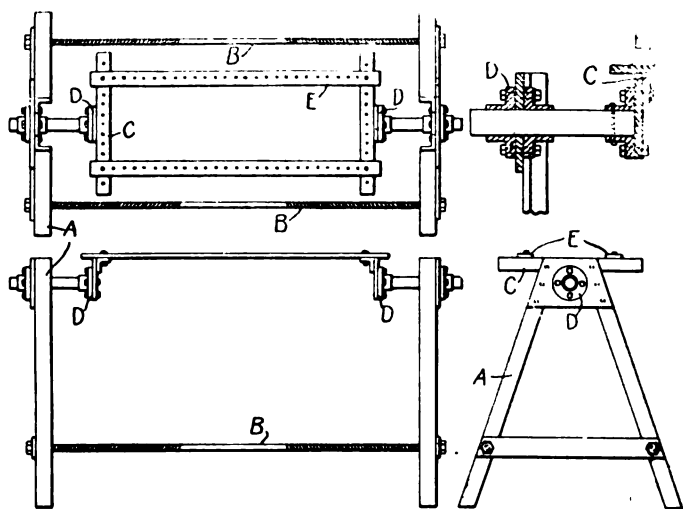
Details of Construction, Showing How the Engine Stand is Made.
